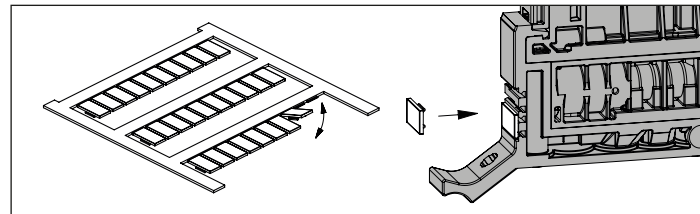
Marking the valve slots using MultiCard format device markers: After printing, remove the device markers from the sprue and clip them onto the valve.
